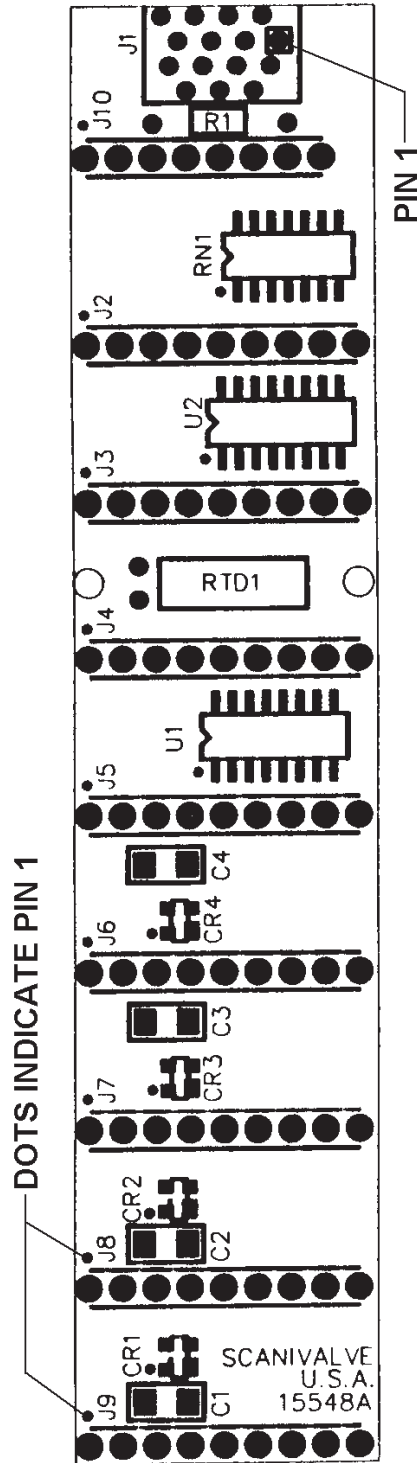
ZOC33 DECODER BOARD LAYOUT
